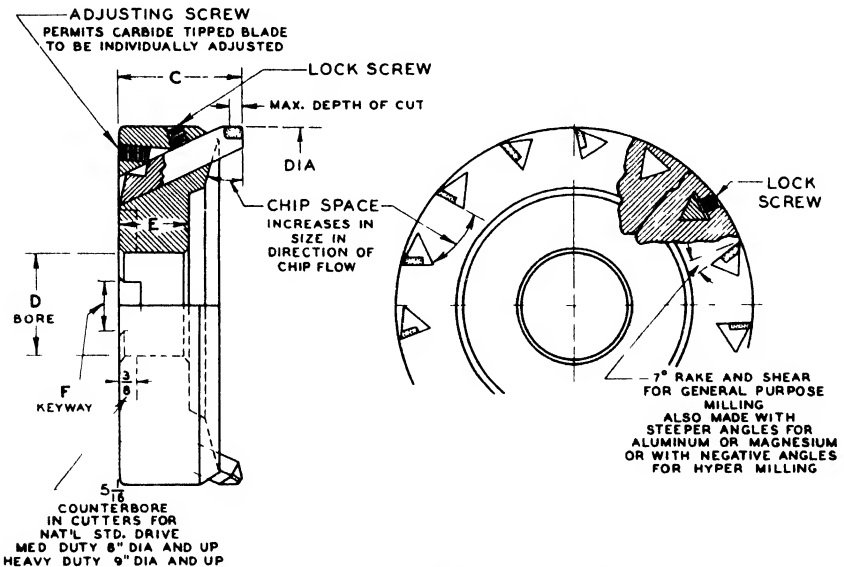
(B) A Cone-Type, "Tri-Bit" Face Mill Made by Weddell Tools, Inc.
